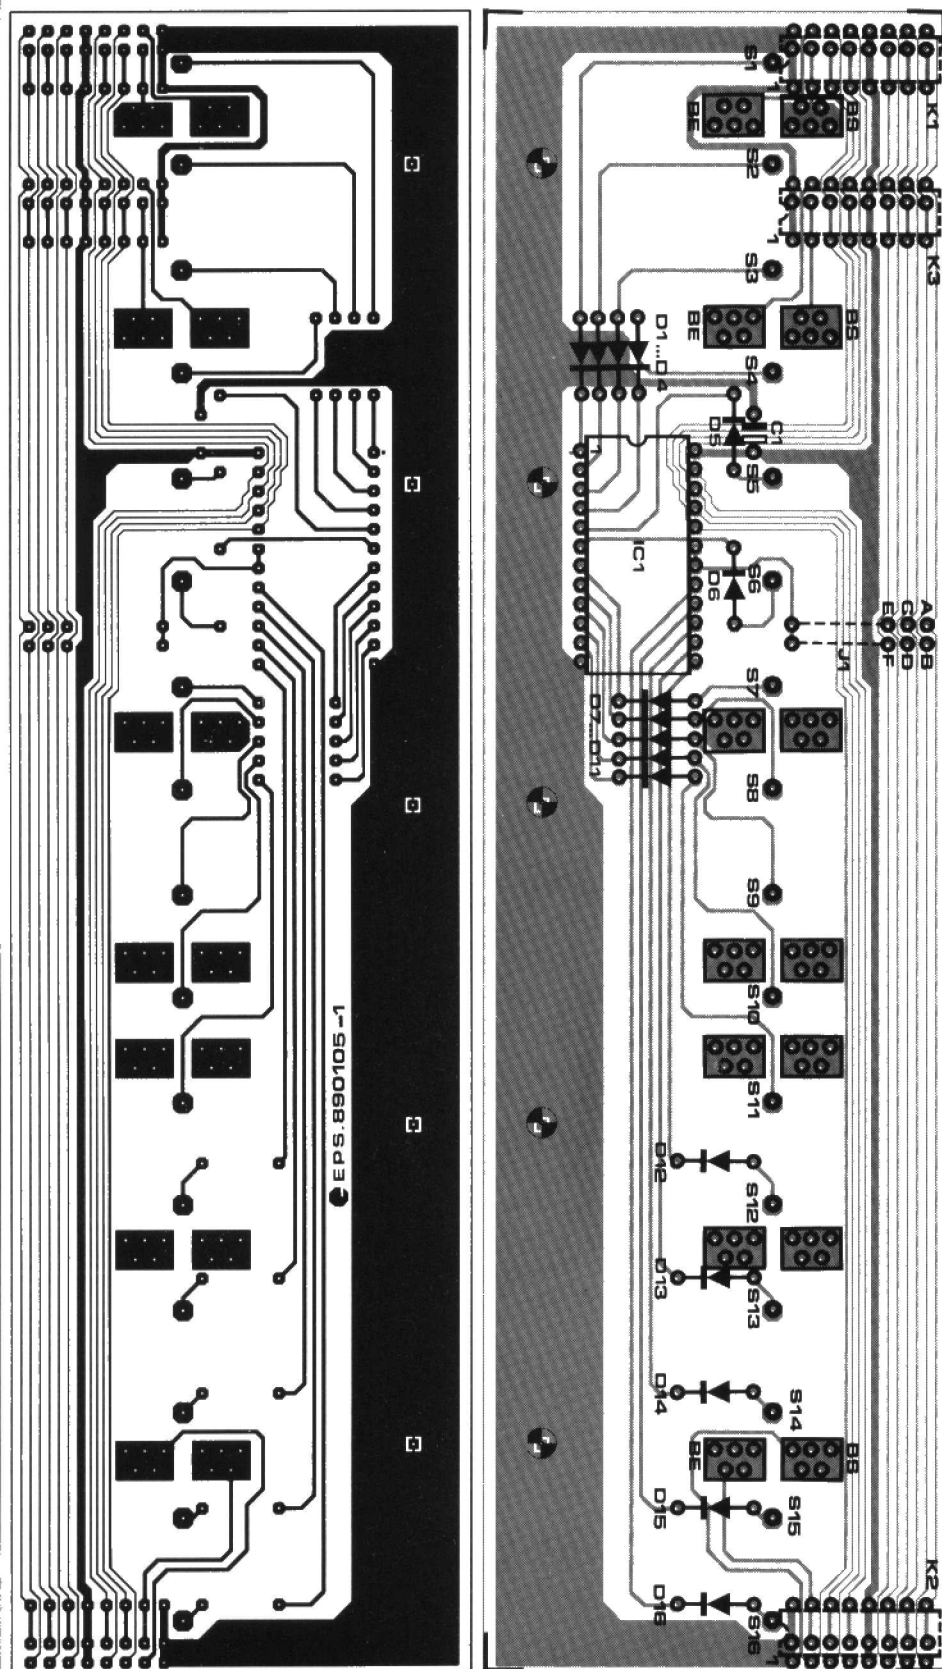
Track layout and component mounting plan of a keyboard decoder. The BE and BS bus bars are fitted on to solder terminals, for which five possible positions are provided. Sockets or pin headers K1 and K2 are mounted at the track side of the board.
